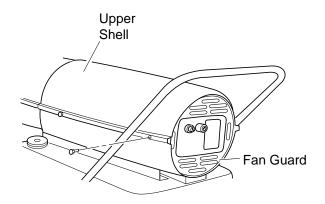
Upper Shell Removal, 150,000 BTU/Hr Model
